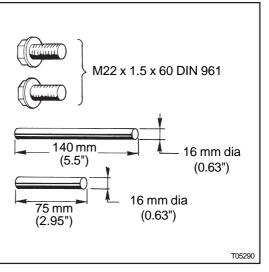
Tool set to free the suspension arms from the steering knuckle carrier
